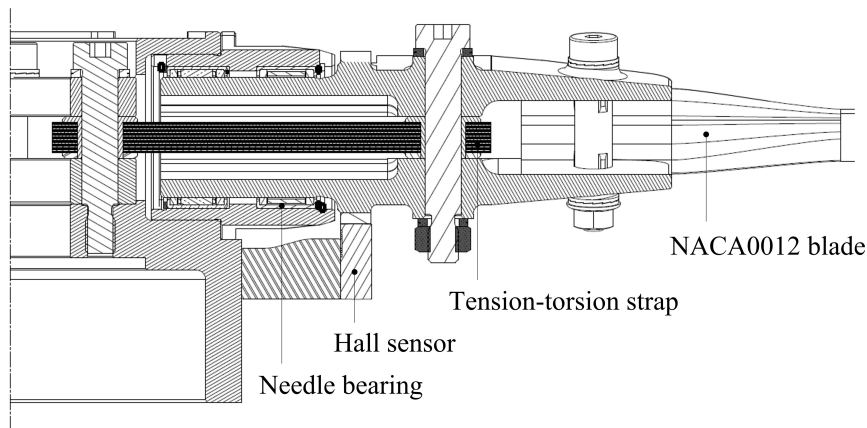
Cross-section of the hingeless MERIT blade attachment [22]
